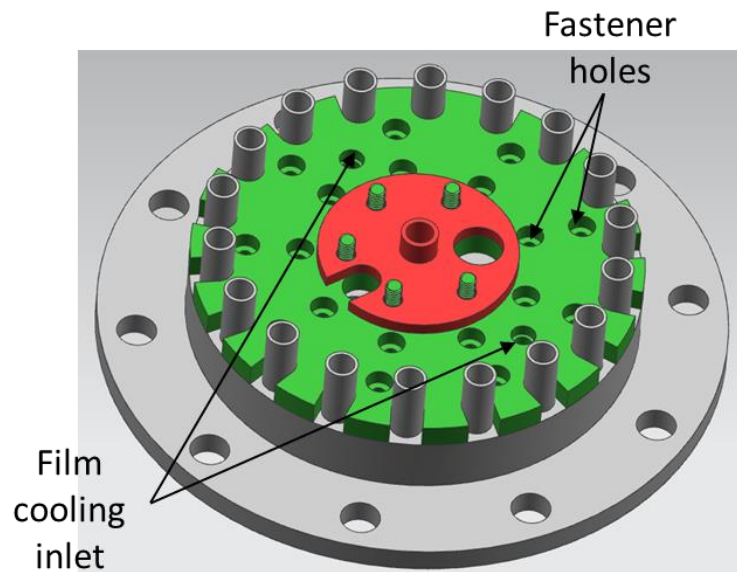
Isometric view of non-welded version of pintle injector
